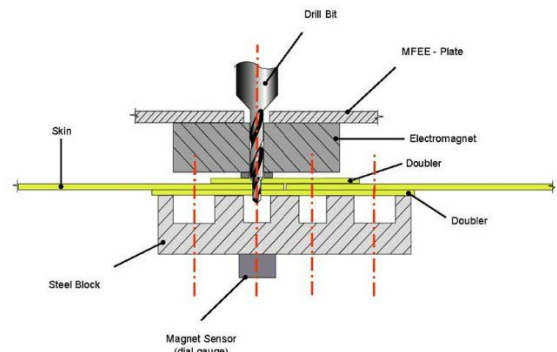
Clamping Structures with Electromagnet and Steel Block During the Drilling Process
